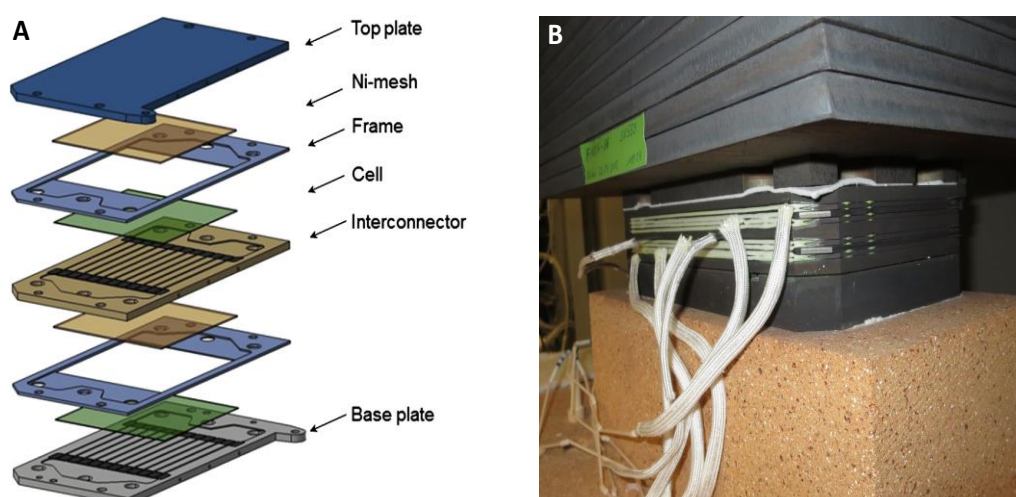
A) Parts and order of a F10 stack [2] and B) Stack after sealing with the clamping weight.
